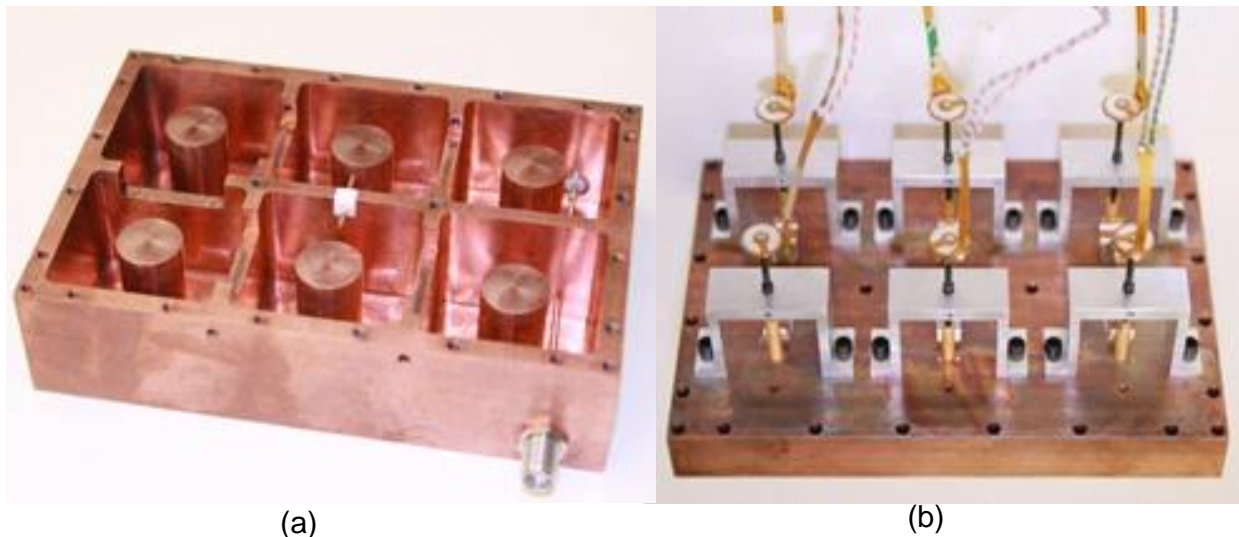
Pictures of fabricated filter: (a) housing, and (b) lid assembled with motors
